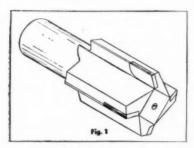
A high speed steel core drill which has worn undersize, can be salvaged by milling recesses in the faces and brazing in standard Carbololy ce-mented carbide tips. The tips are then ground to original tool dimensions. The same process can be used before the tool is worn below size if it is desired to increase cutting speed or reduce consumption of tools.
